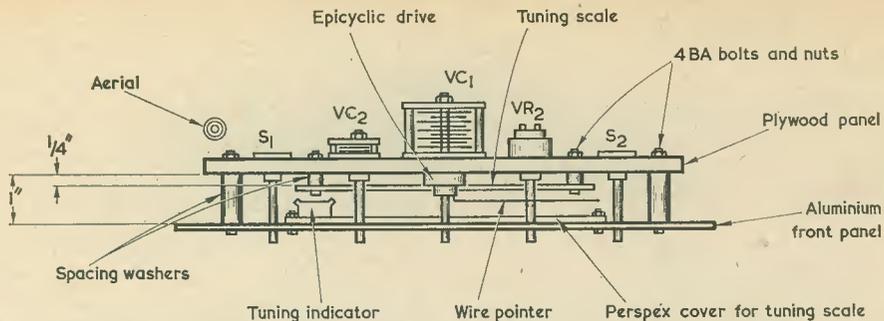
Detail illustrating the manner in which the receiver panel, tuning scale and front panel of the cabinet are assembled together
